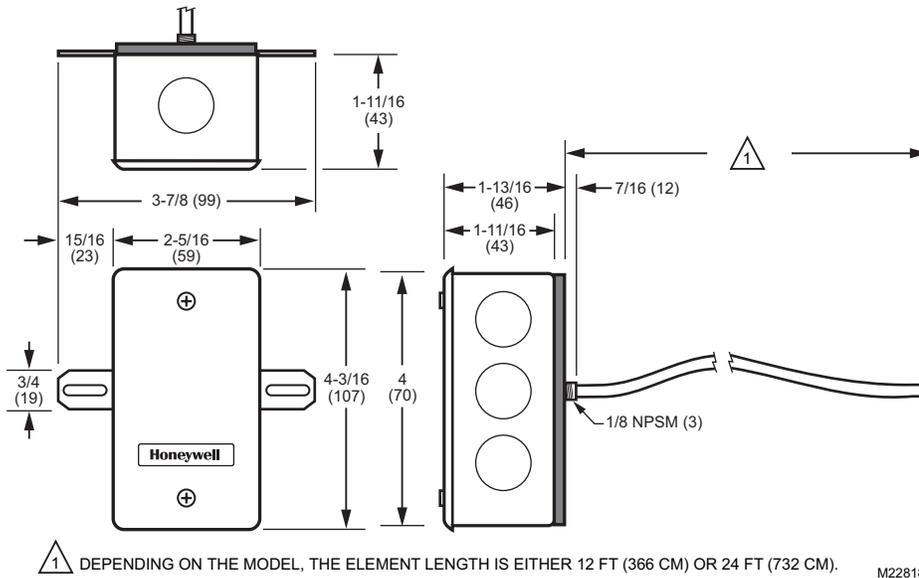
C7021R, C7023R, C7041R dimensions in in. (mm).
